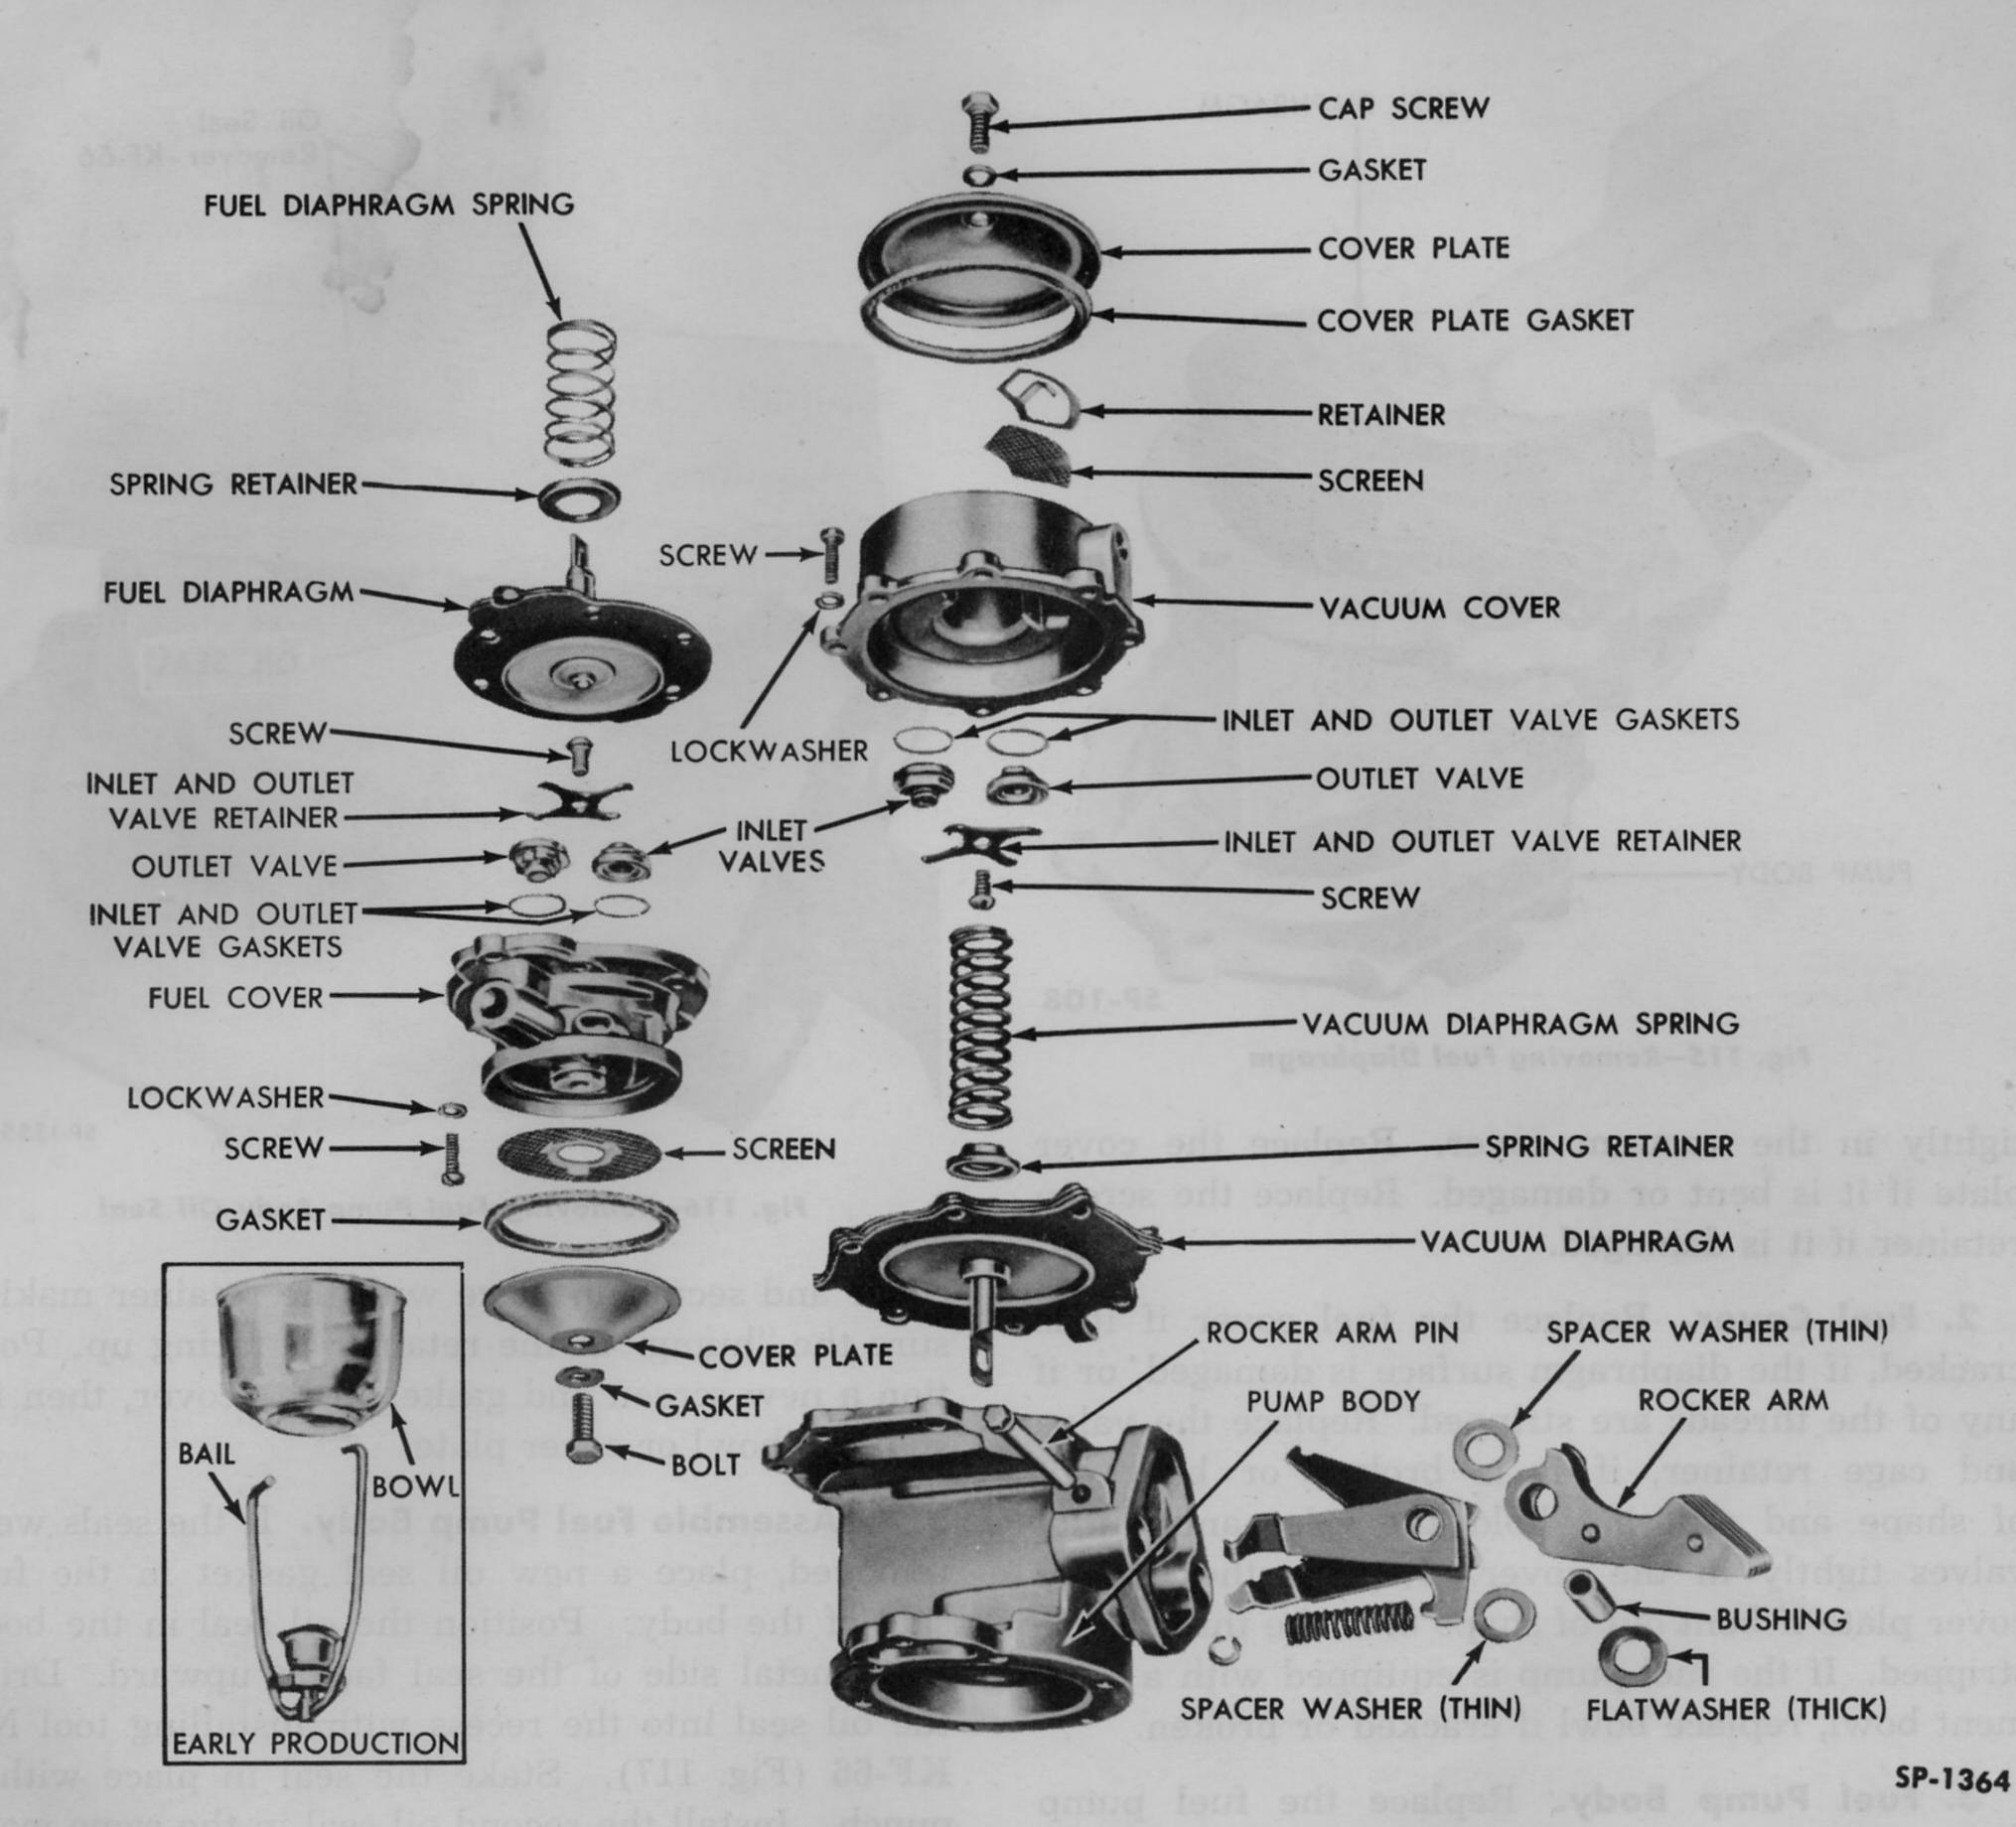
Double Diaphragm Fuel Pump—Exploded View
